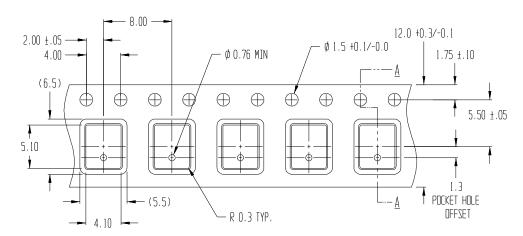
Tape for 4.72 × 3.76 × 3.50 mm Package (all dimensions in mm)
